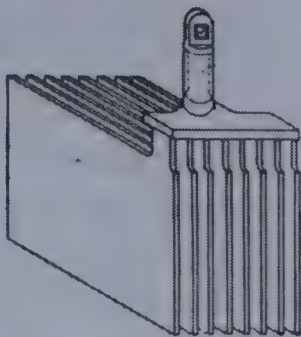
A—Positive Plates Assembled Ready to Place in Jar.
